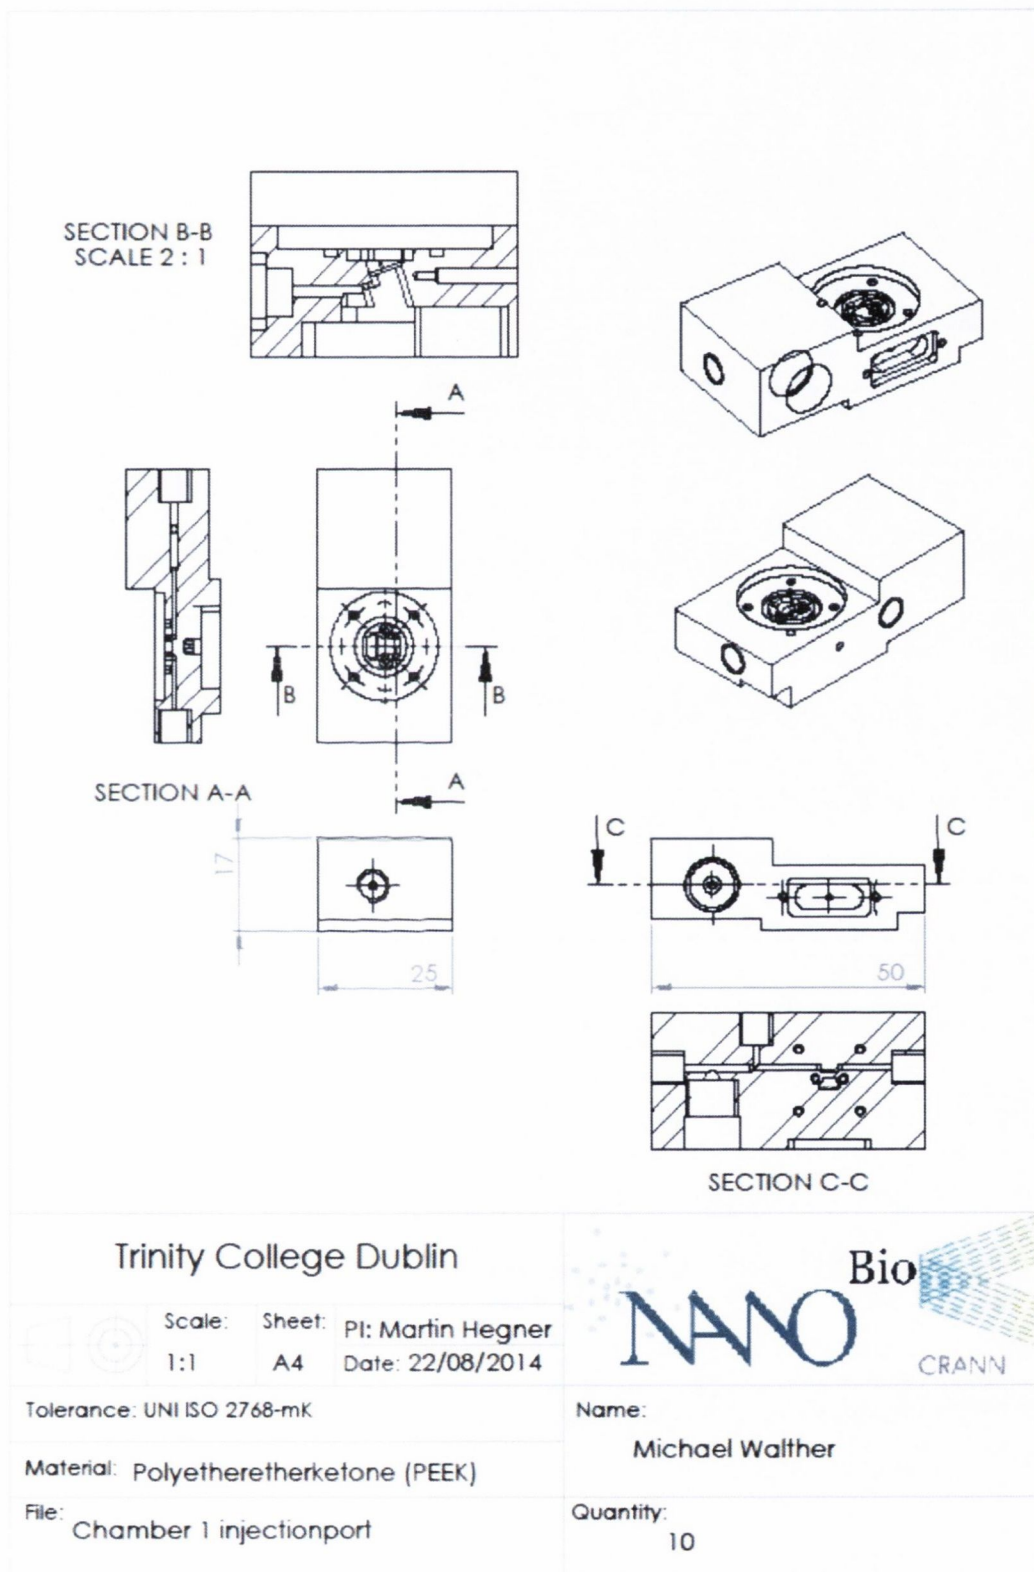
Drawing of the measurement chamber with one injection port. See section 2.2.2 for more information.
